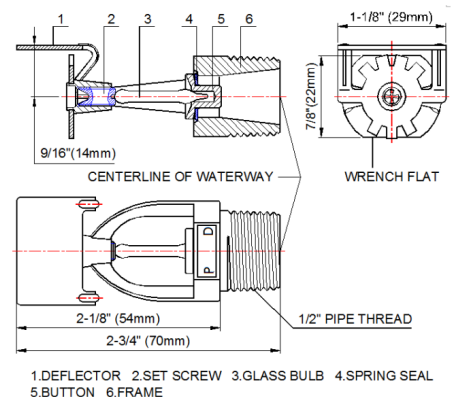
FIGURE A : MODEL PD017/PD018 HORIZONTAL SIDEWALL SPRINKLERS
